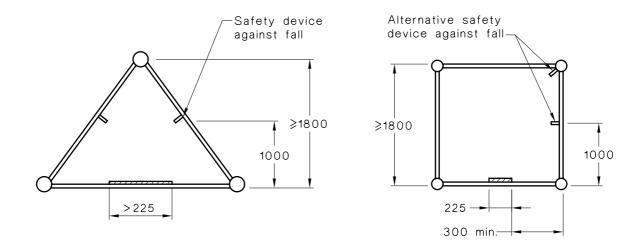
(C) WALKWAYS—HEIGHT OF JIB ≥1.80 m
